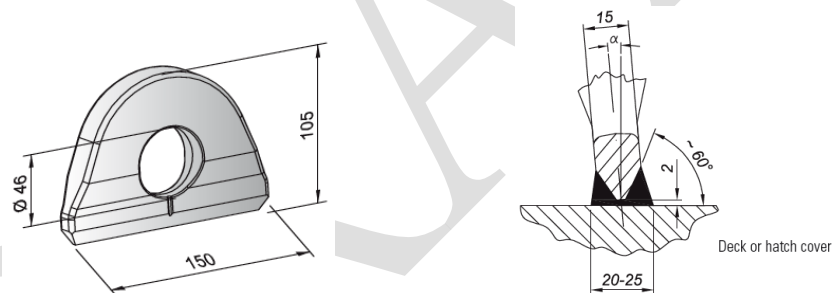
Lashing plate (left) and scheme for welding on deck, hatch cover or lashing bridge (right).
